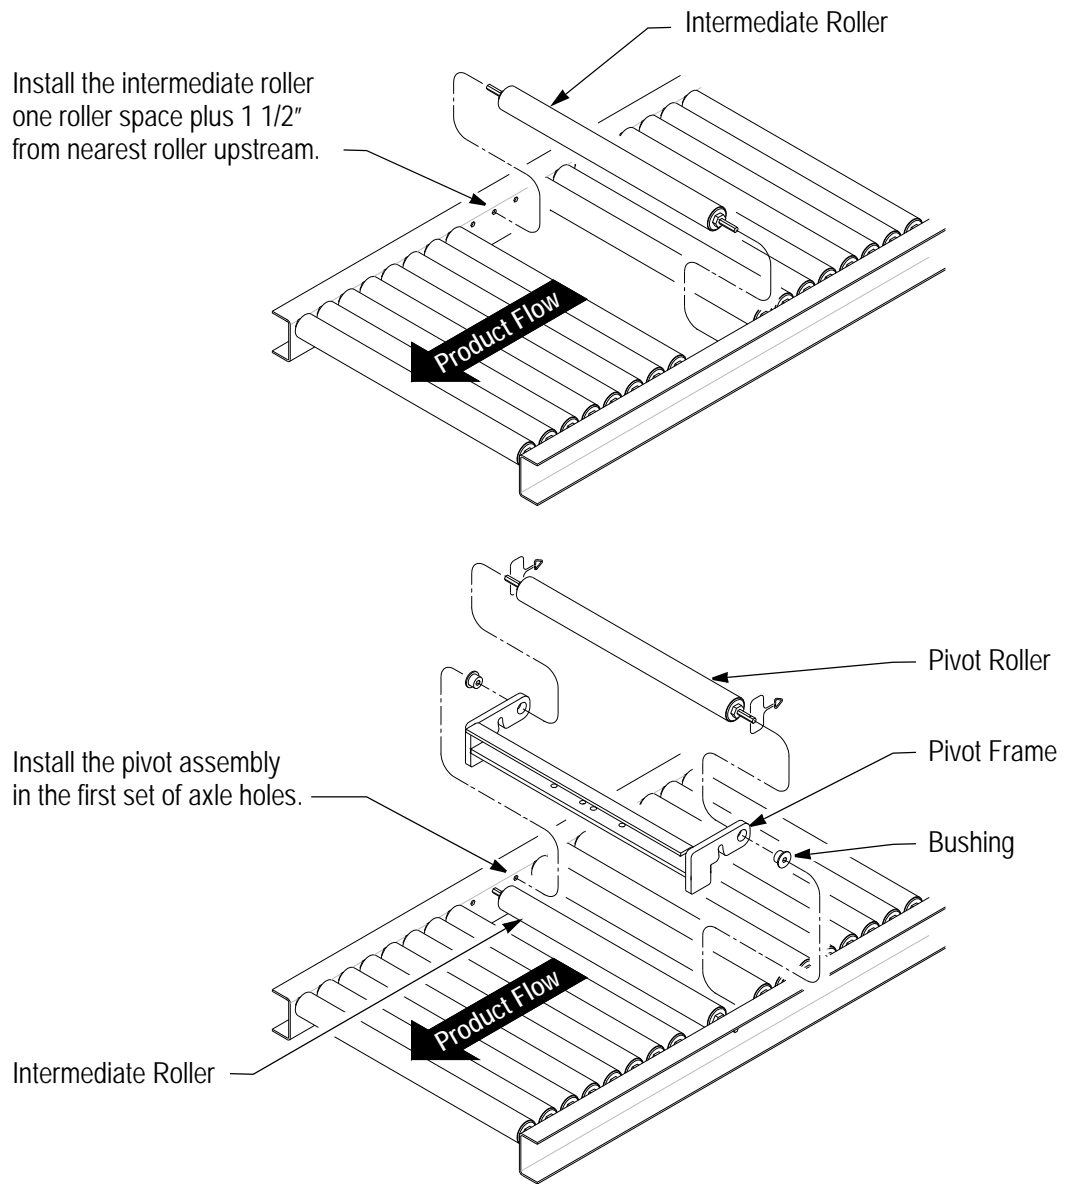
Install The Pivot Assembly – 1 1/2" & 3" Roller Centers
